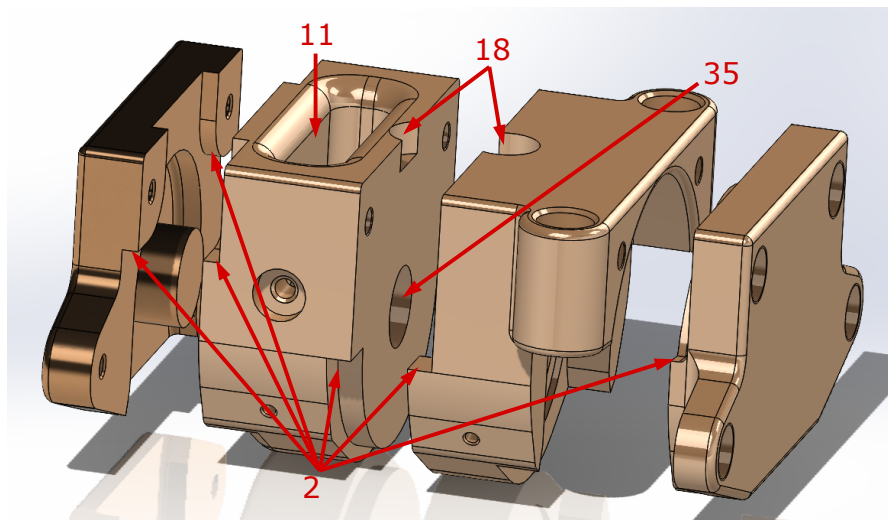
Exploded view of the upper structure from above. (2) Flanges, (11) Hole for the top slider, (18) Hole for the locking pawl, (35) Hole for sun bearing.
